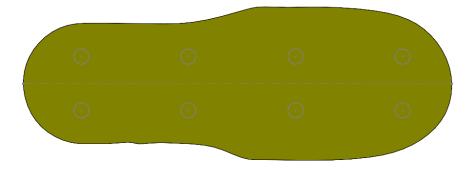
CAD Model of Top of Preliminary Sensing Module Assembly
